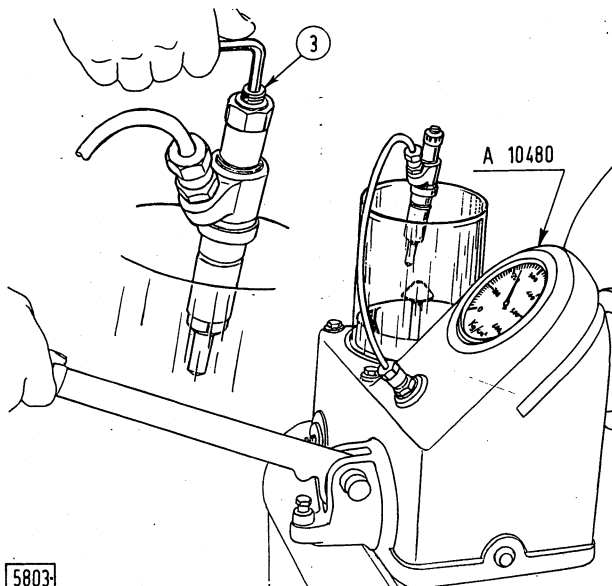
Nozzle testing with hand pump and adjusting the spring-loading adjusting screw (3).
